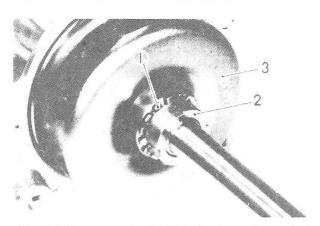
To remove the YT 60 brake drum, flatten the lock washer tab (1), loosen and remove the ring nut (2) and slide off the drum (3) (Sec 6)
